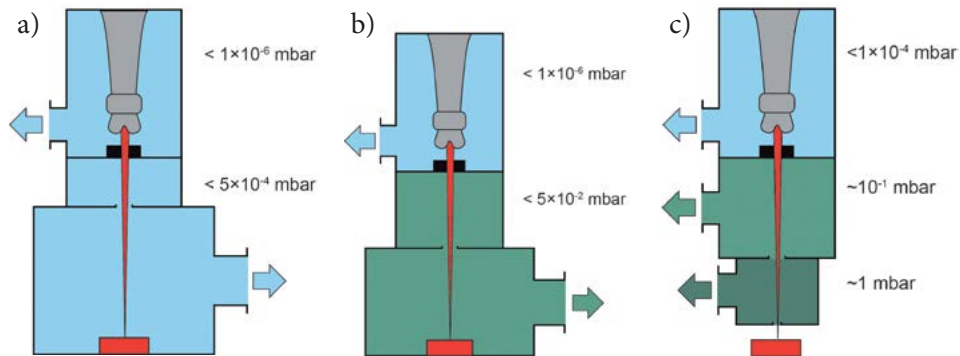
Schemes of electron beam welding machines due to working chamber vacuum a) high vacuum, b) medium vacuum c) welding under atmospheric pressure [6]
